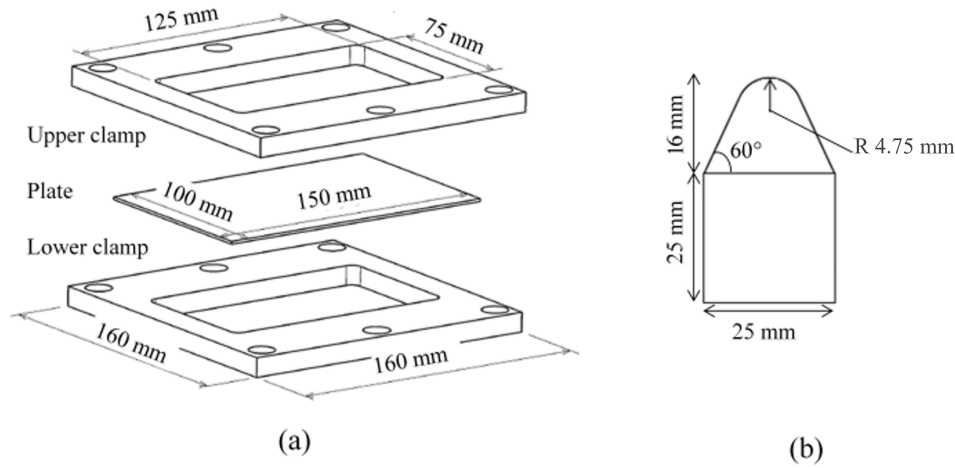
a) Fixture geometry. b) Impactor nose dimensions [13].
